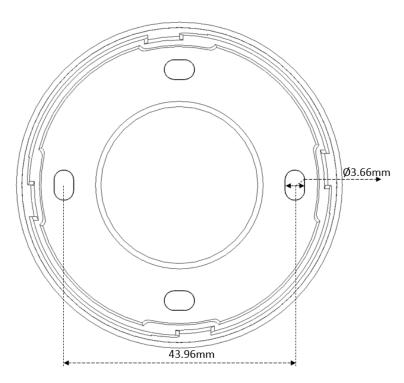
Modbus 4in1 Sensor Mounting Holes - Flush Mount
